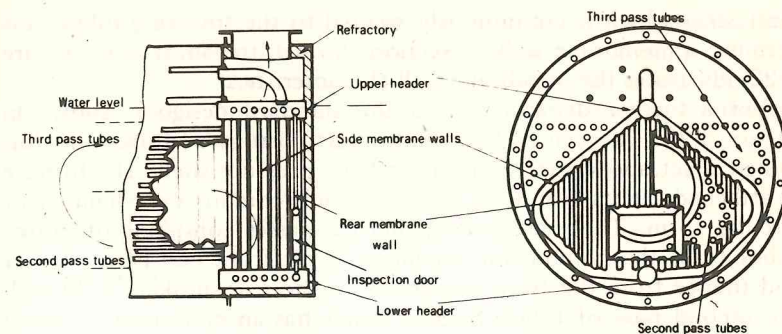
'Steambloc' boiler showing arrangement of integral superheater at end of first pass
